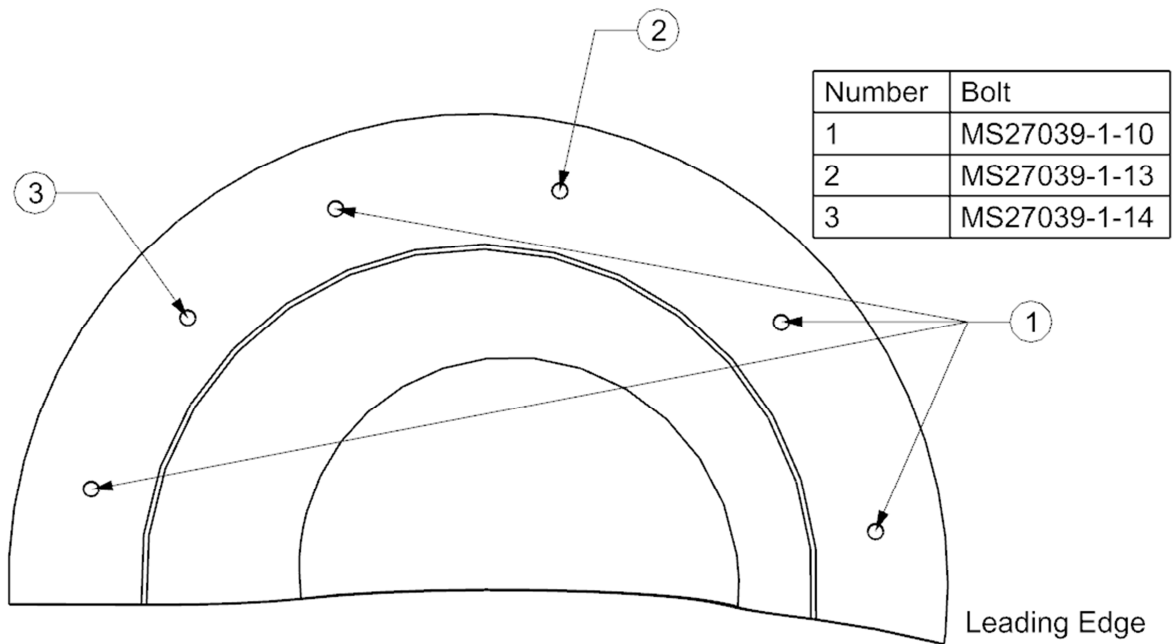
Center Wing Pylon Forward Lug Cover Fastener Placement
